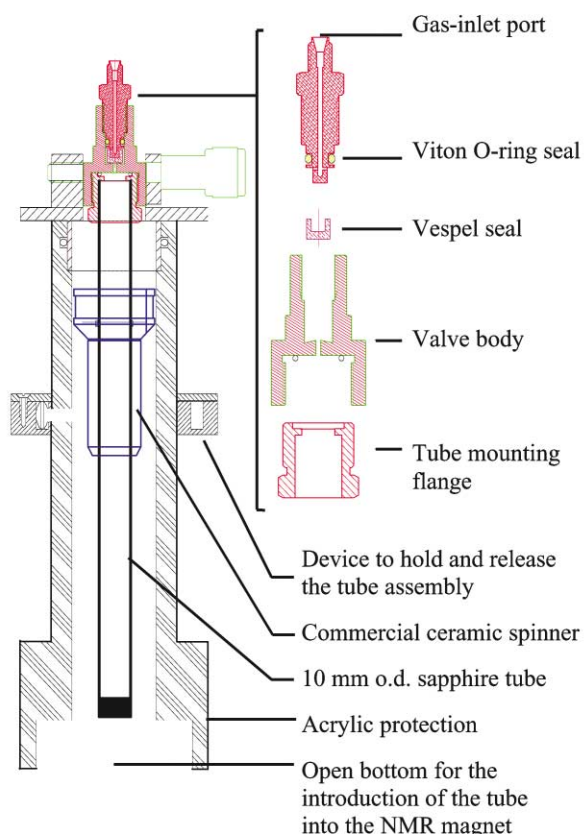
Schematic drawing of the sapphire tube/Ti-valve assembly (expanded) and the safety device.
